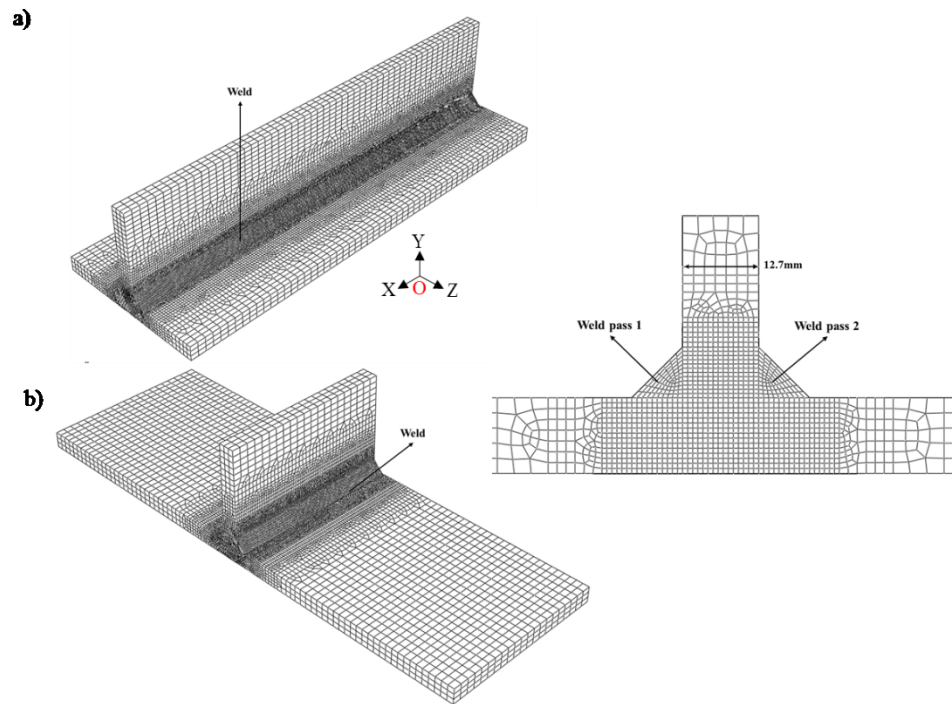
Mesh details showing fine to coarse transition in the fillet weld model: a) Fillet welded plate with the long weld and, b) fillet welded plate with the short weld.
